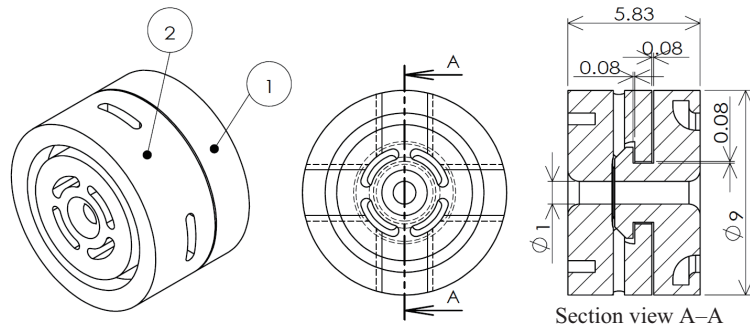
3D-printed model of a revolute hinge comprising two components (Parts 1 and 2).
